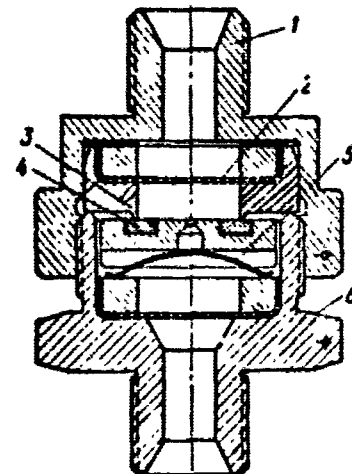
Check valve with plate spring. 1) intake pipe; 2) filter; 3) valve seat; 4) valve shoulder seal; 5) plate spring; 6) exhaust pipe.
